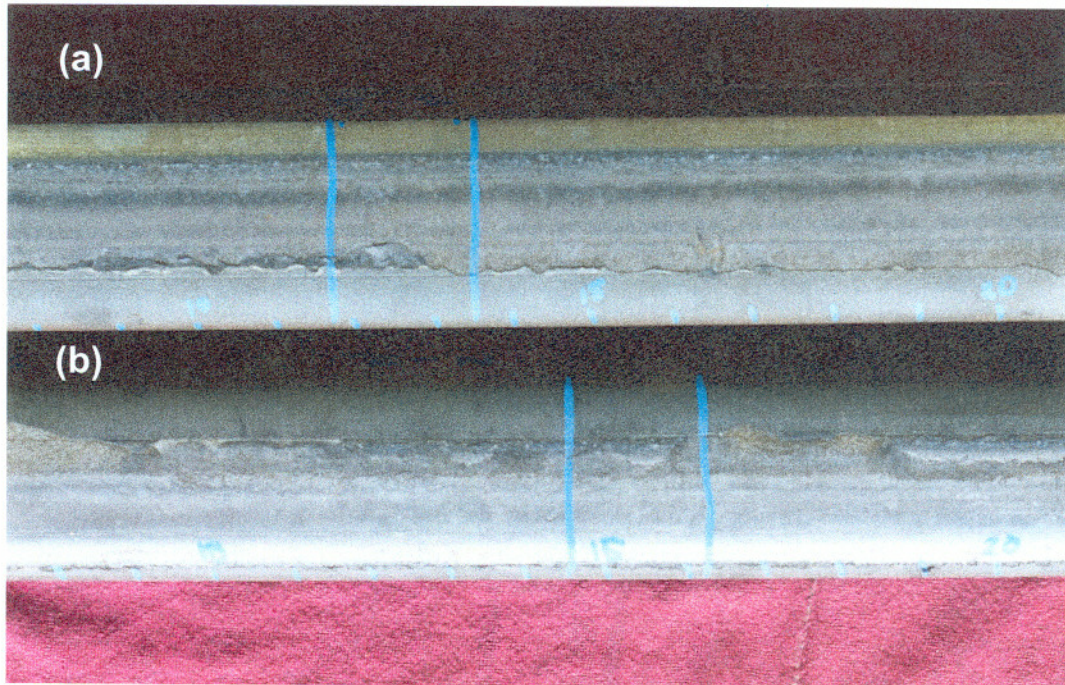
Sectioning of track lab coupons, (a) TL3 and (b) TL4.
